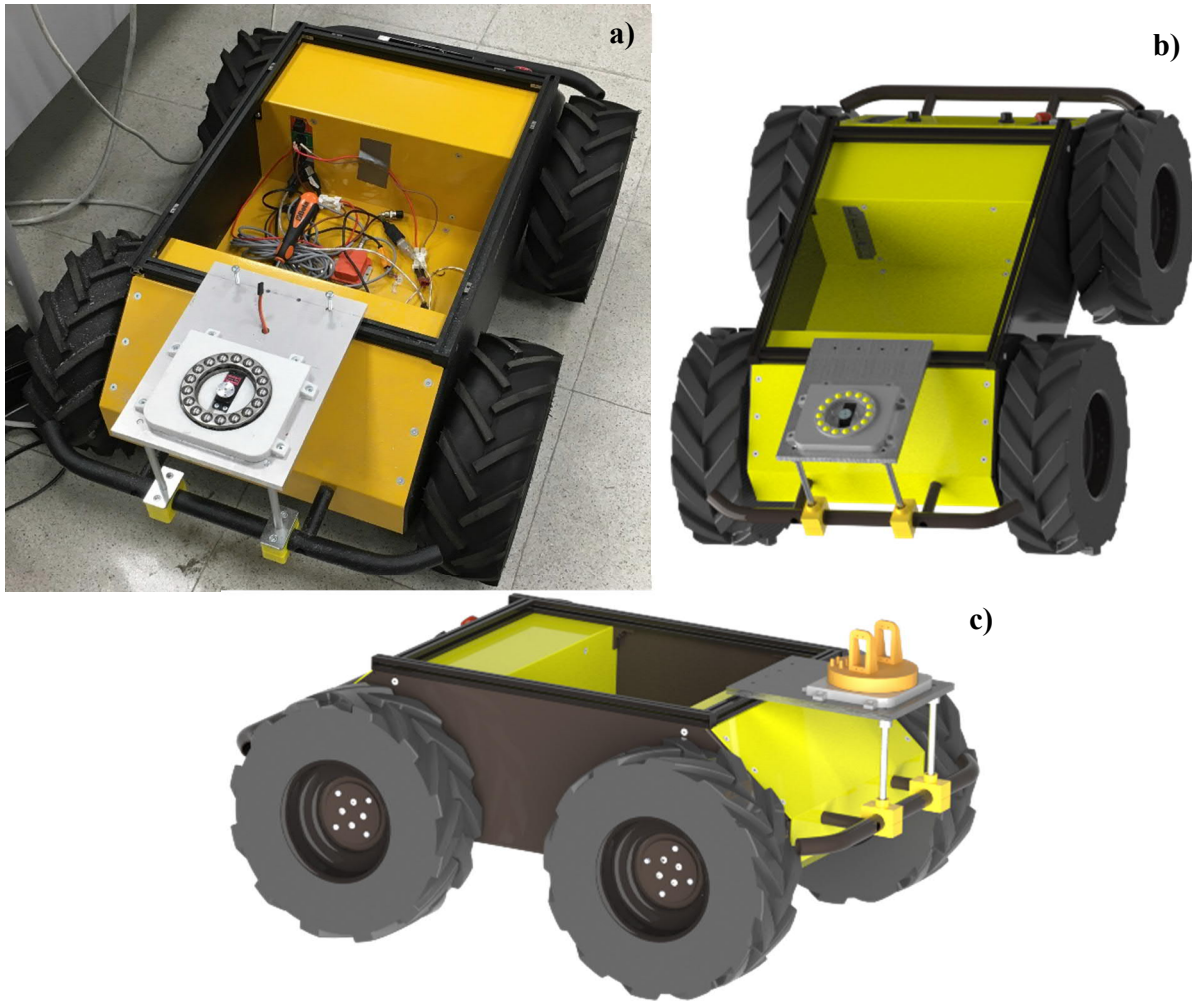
The base link with ball-bearings (a) implementation, (b) the fixed part design, (c) the second part design
